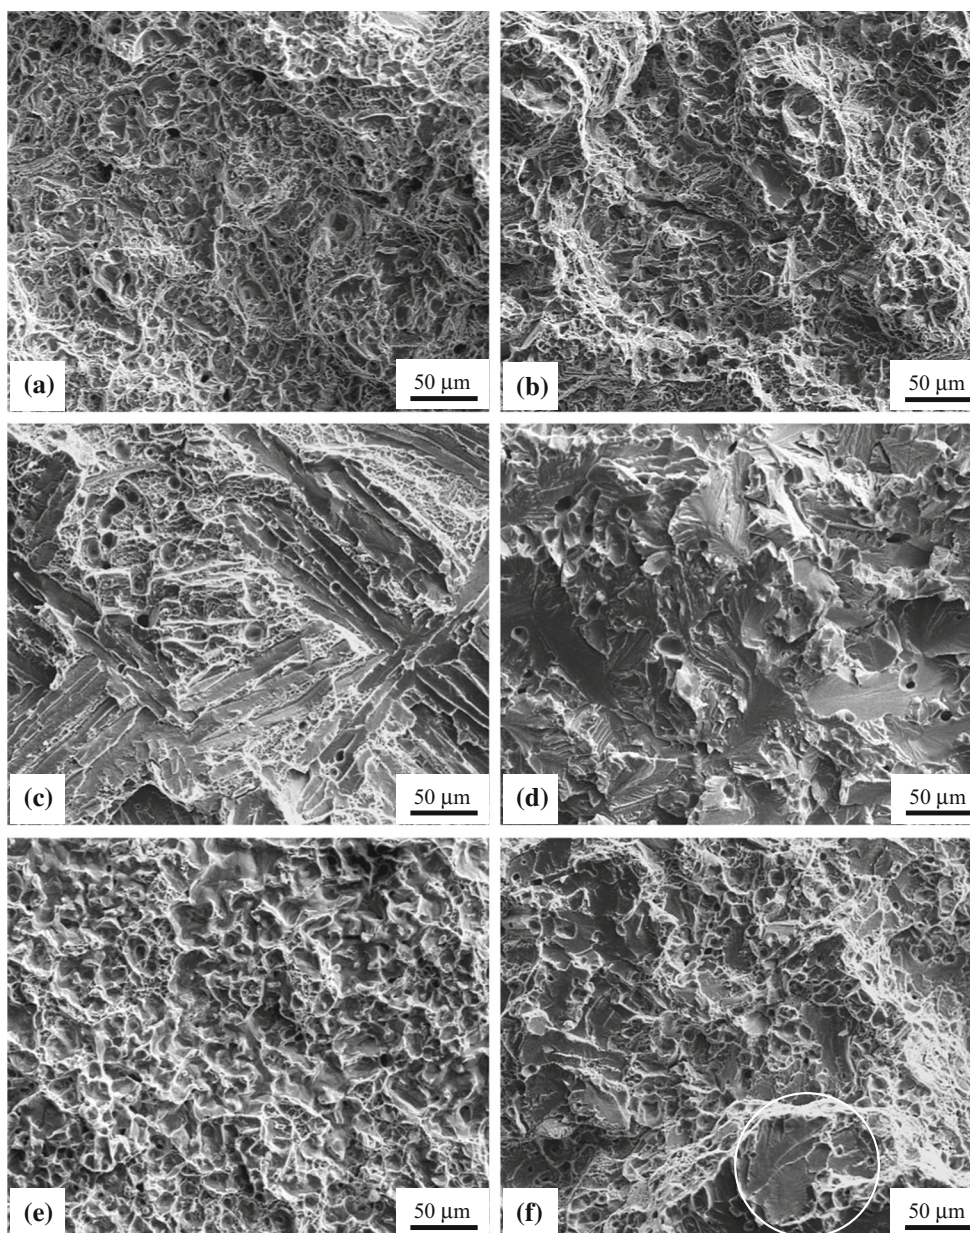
Scanning electron fractographs of the specimens after tensile failure: (a) sample #1; (b) sample #2; (c) sample #3; (d) sample #4; (e) sample #5; (f) sample #6
